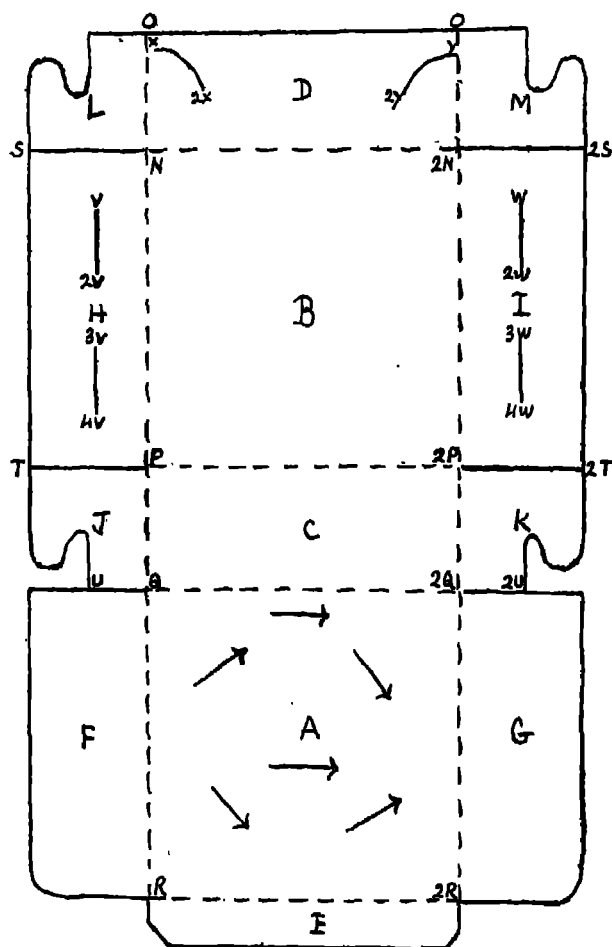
SINGLE-PIECE CAKE PACKER'S PRINTED BOX.
